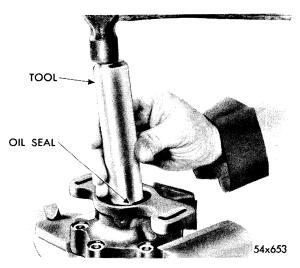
Installing Pump Shaft Oil Seal (Tool C-3230)
